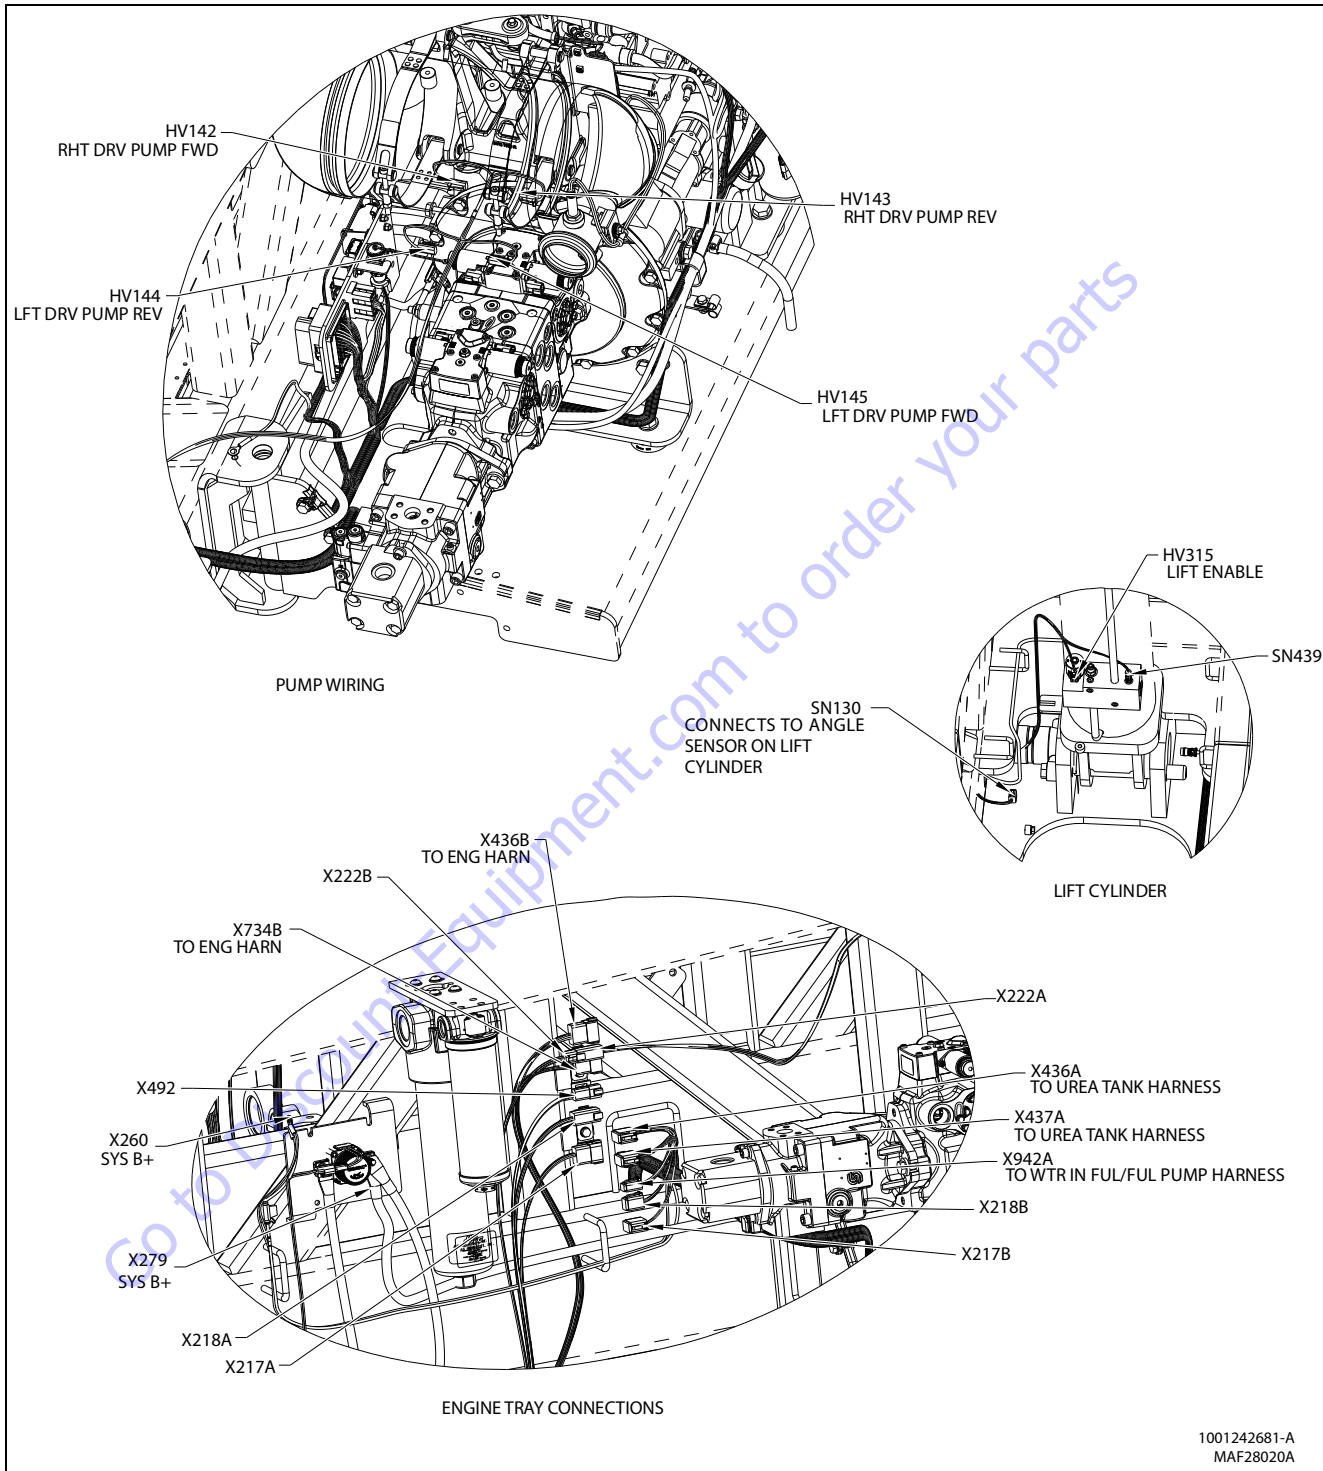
Electrical Installation (T4F) - Sheet 8 of 11
